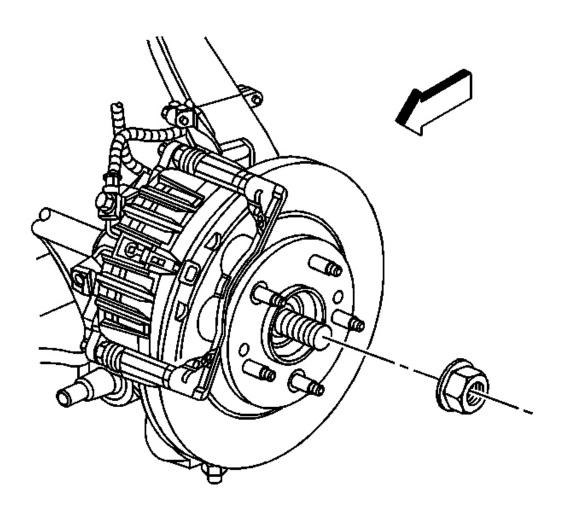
Removing/Installing Wheel Drive Shaft Nut Courtesy of GENERAL MOTORS CORP.
